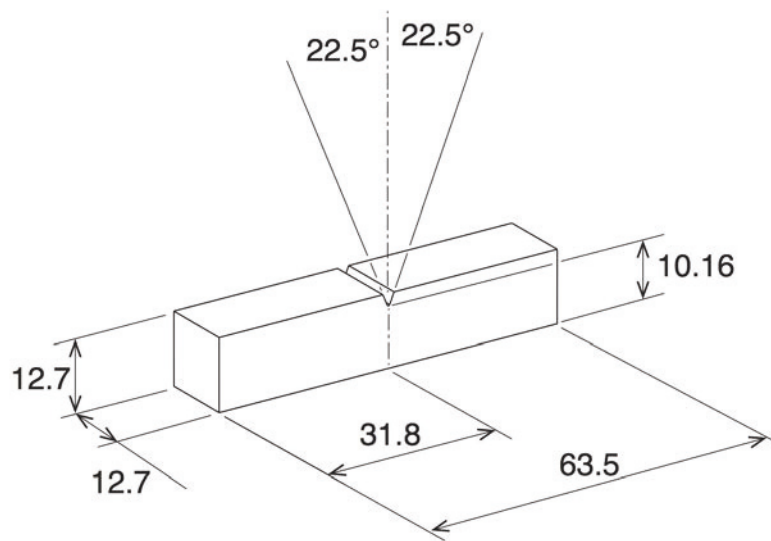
Dimensions of Izod test specimens (all dimensions in mm).
